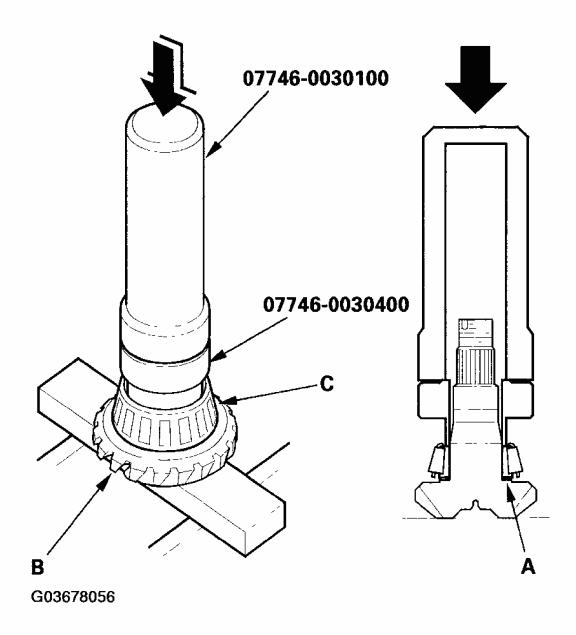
Installing 35mm Thrust Shim On Transfer Driven Gear Courtesy of AMERICAN HONDA MOTOR CO., INC.
